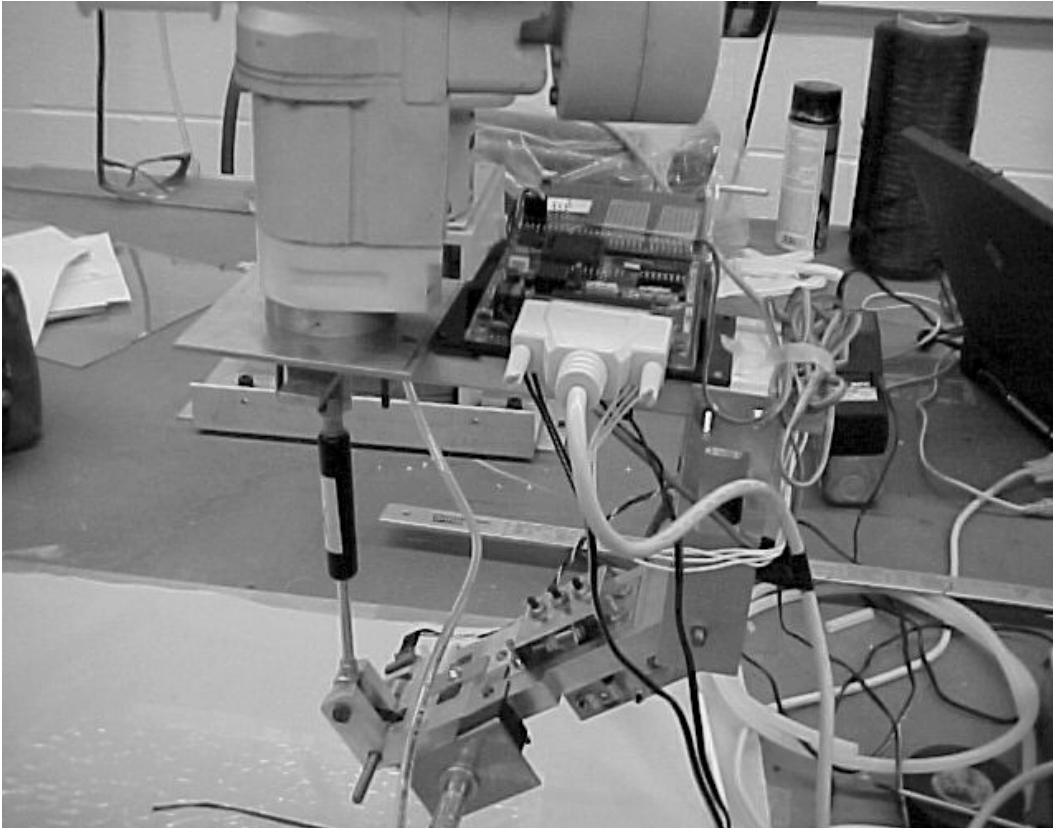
Prototype placement head – Controller Board and Swing Assembly
